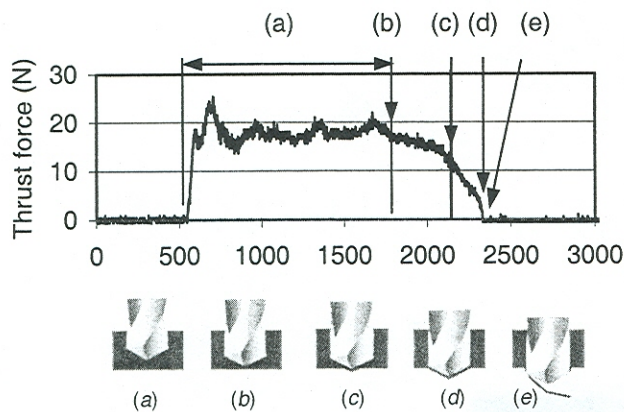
Measurement of drilling thrust force matched with corresponding drilling stages. (a) Steady-state drilling, (b) deformation initiated, (c) chisel edge aligned with exit surface, (d) cutting finished, (e) fracture occurred.
